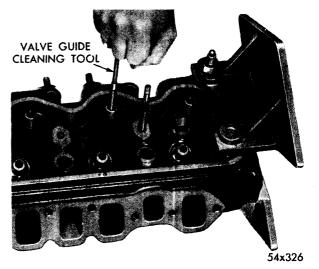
Cleaning Valve Guides With Tool C-756 (Typical)
